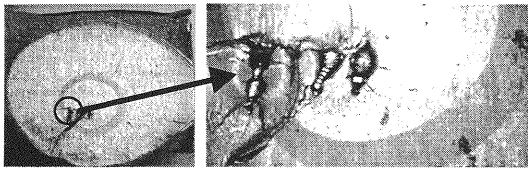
Multiple defects and fatigue crack initiation point
